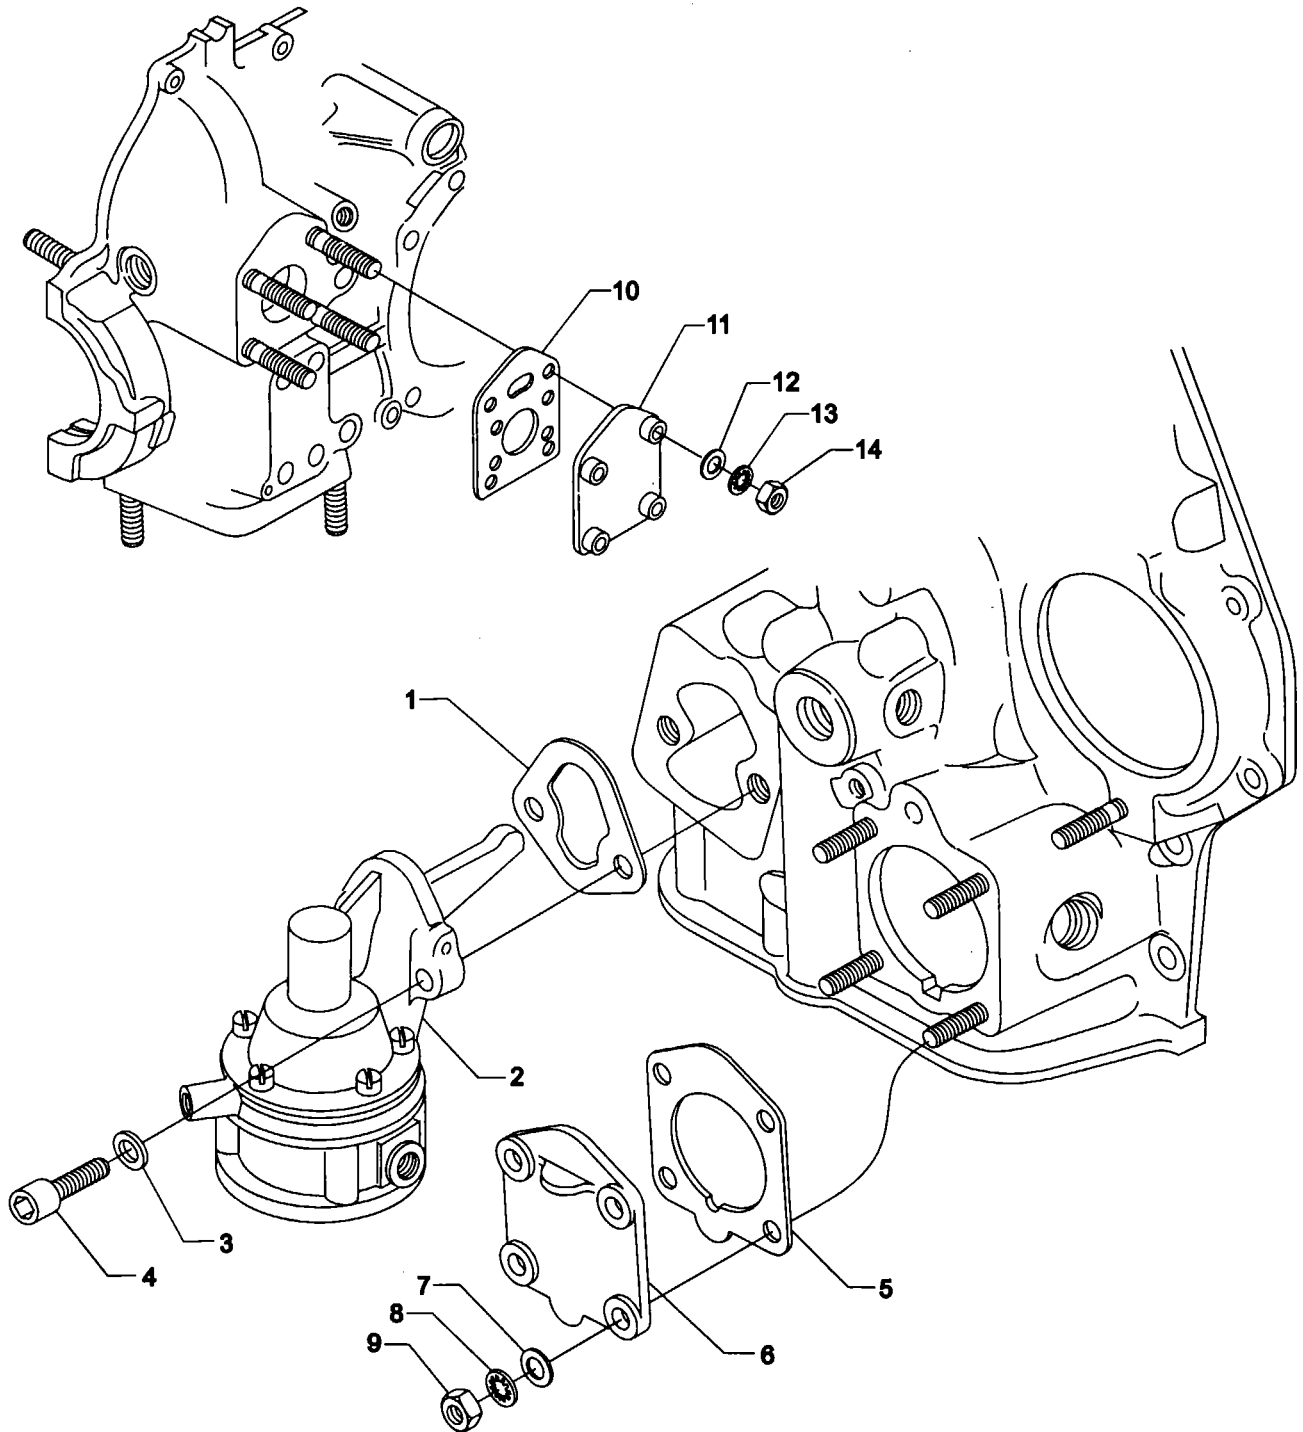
FUEL PUMP AND PROPELLER GOVERNOR DRIVE COVER
